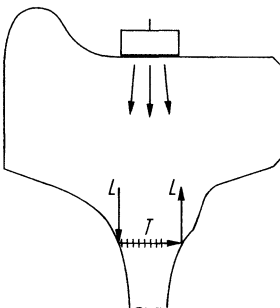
Testing the rim of a monobloc railway wheel with a 61° reflection
